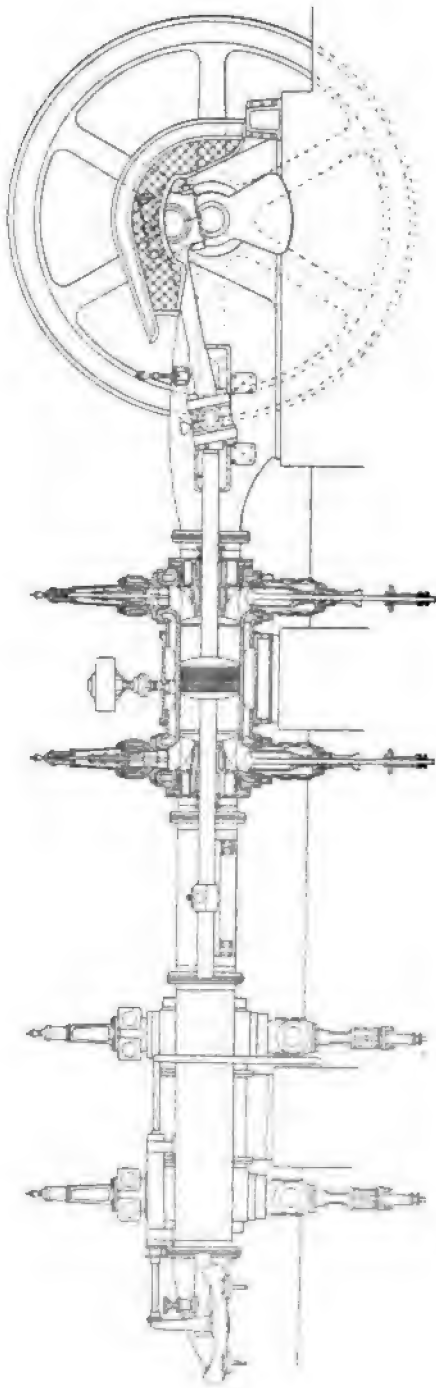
500 BHP. Gas Engine. Part Elevation and Section.
